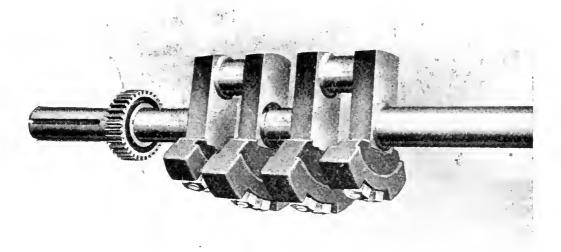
Crankshaft of Secor Two-Cylinder Motor. The gray iron counterbalance weights are bolted on as shown.
